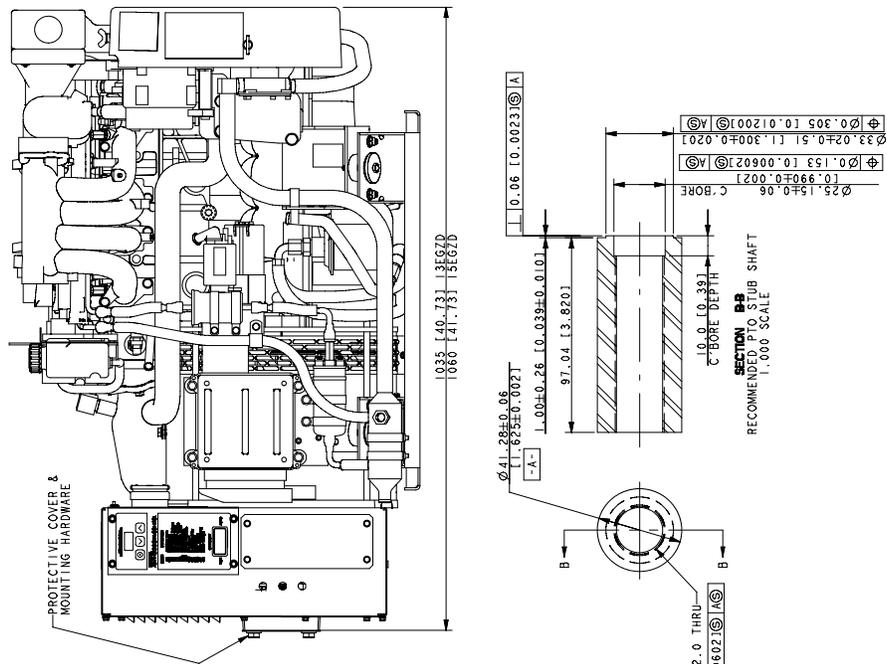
Dimension Drawing ADV-6817B-D, 13/15EGZ Model with PTO
